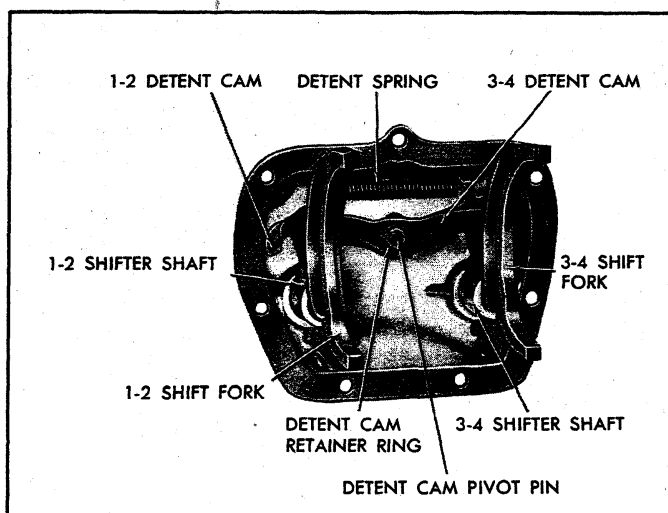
M - Transmission Side Cover, Shift Fork and Detent Assembly
